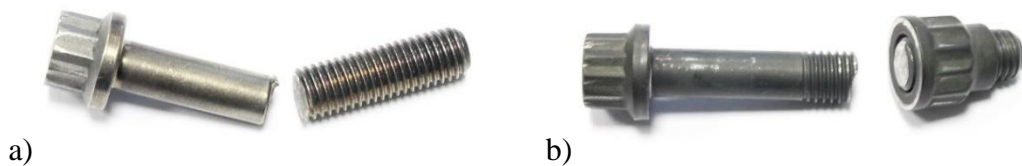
Failure of Bolt: a) Torsion in the Threads b) Surface Torque
